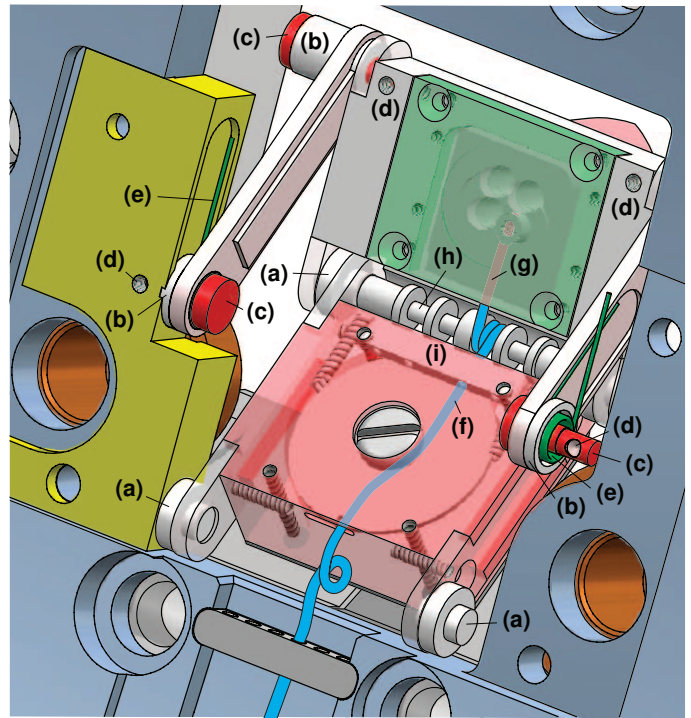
A back-view of the WASP: (a) ‘compound’ zirconia bushings, (b) alumina bushings, (c) shoulder bolts, (d) set screws, locking shoulder bolts against rotation, (e) return springs, (f) Teflon-coated electrode wire, (g) uncoated wire, terminating at the base of copper electrode contacts, secured by set screw, (h) alumina wire-support axle, and (i) alumina heat sink. Not shown for clarity: RHS mounting piece, three additional electrode wires and copper contacts, coil wires, limit springs, and small hardware.
